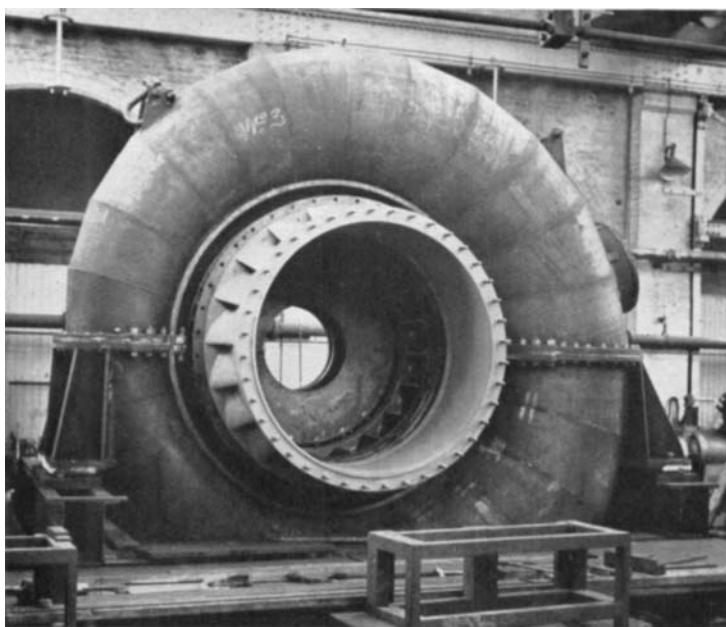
Brake Nozzle Piece Assembled on Reaction Turbine
